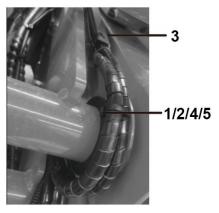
Assembling the wiring board of fifth fork (SR4069D)
